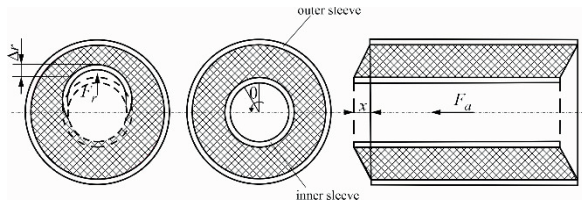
Radial, torsional and axial displacements in bushing [1].
